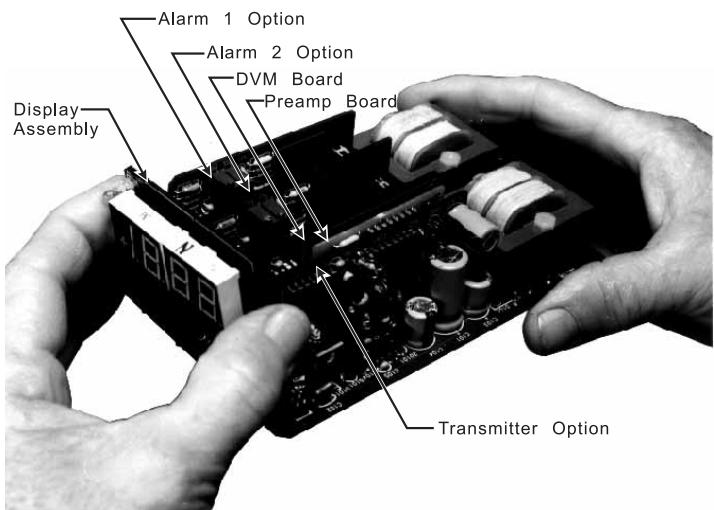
shows the internal assembly. To install options you must first remove the display assembly as shown. To remove it pull straight up.
